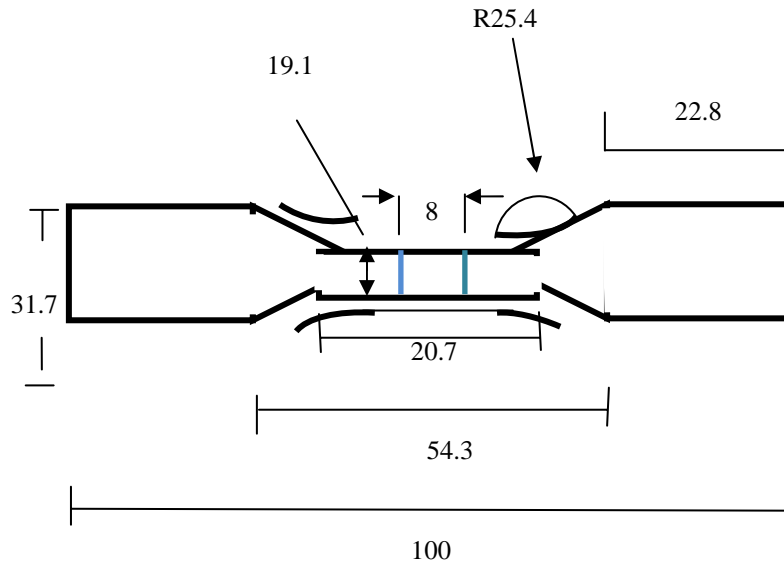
Specimen for Tensile Testing of Welded Plates according to ASME Section 9 Code QW.462.1 (a) Specifications in mm. Thickness 8 mm.
